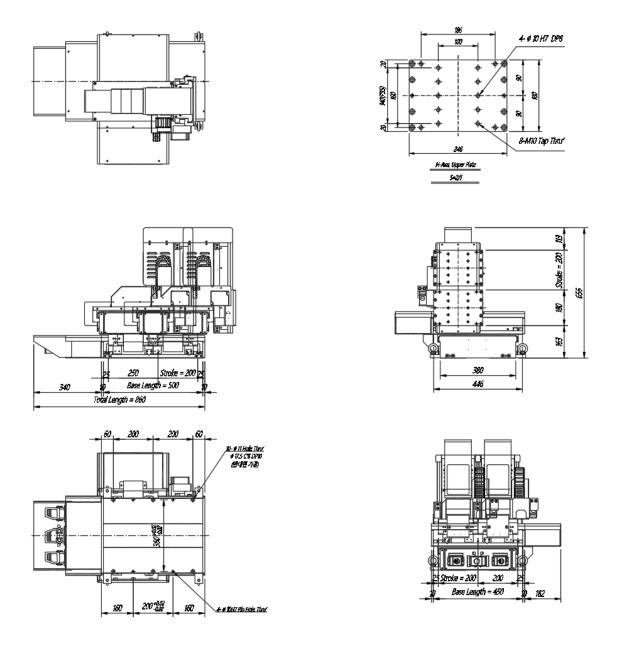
External Dimensions and Operation Area of the Manipulator [HJ300, HJ320, HJ325 Series]
